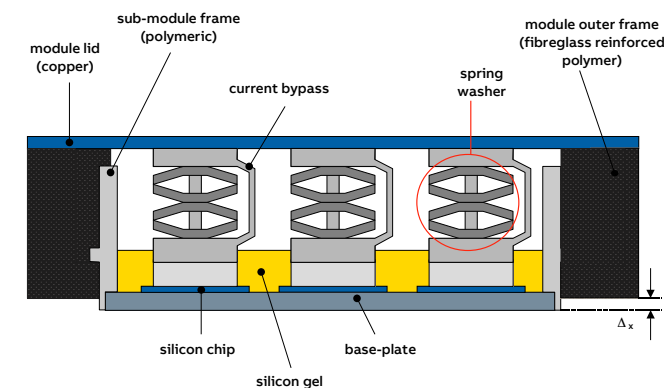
Sectional view of ABB multichip press-pack with individual spring contacts: the chip bears the force determined by the spring; excess force is borne by the housing walls. The drawing illustrates one multichip submodule in one press-pack housing.
